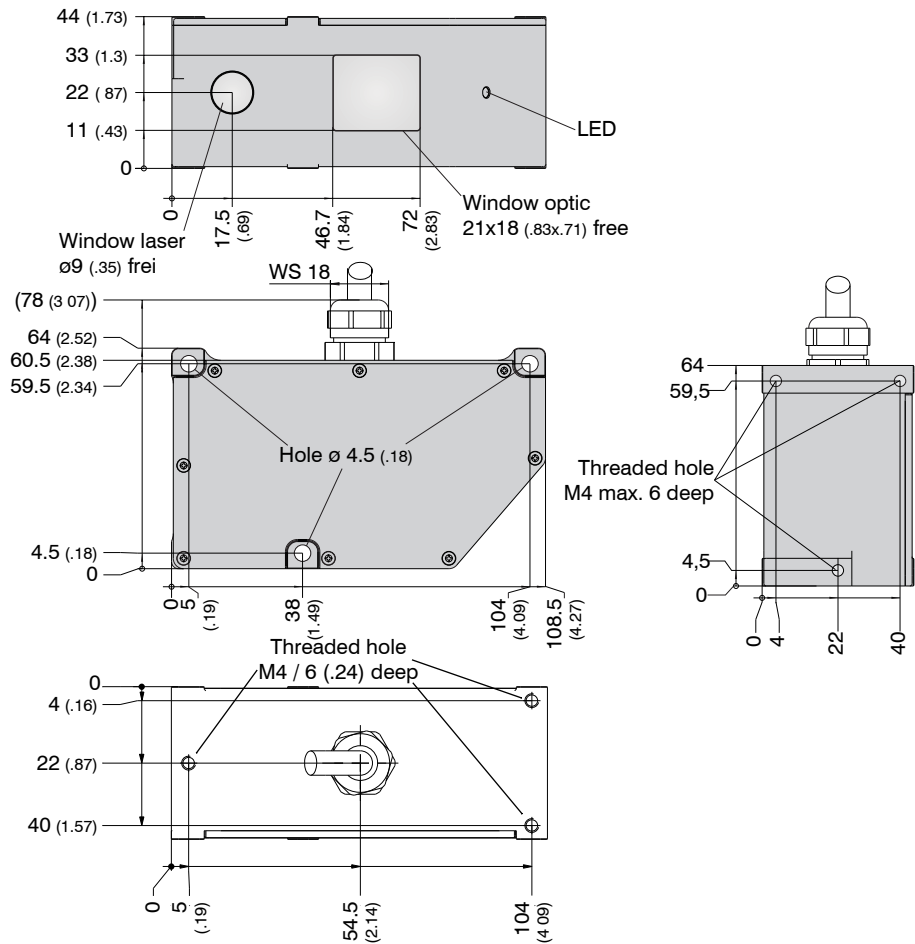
Dimensional drawing LLT 28x0-25, dimensions in mm (inches), not to scale
